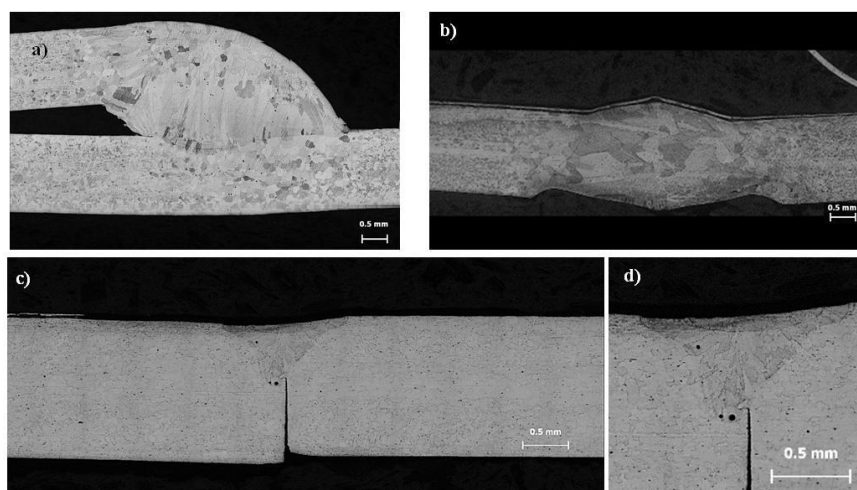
Macrostructural profile a) GMAW, b) GTAW, c) and d) LASER welds.
